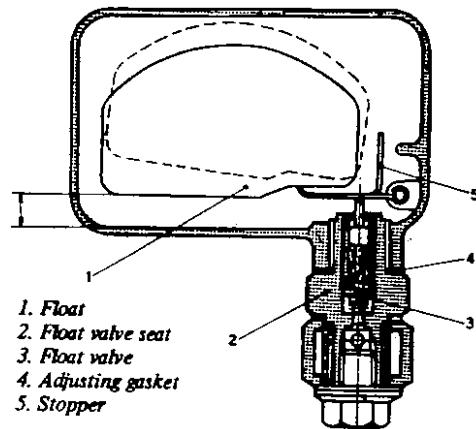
Adjusting the fuel level - D3034C carburettor
